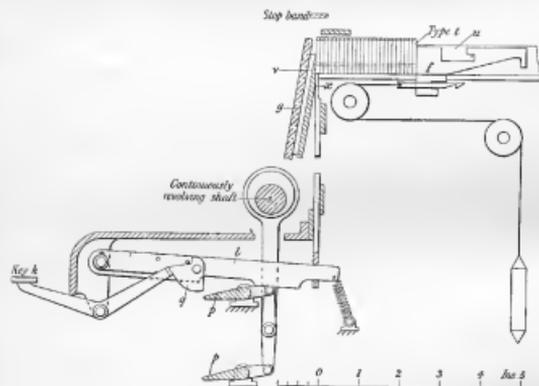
Pulsometer composing machine; type-freeing mechanism.
